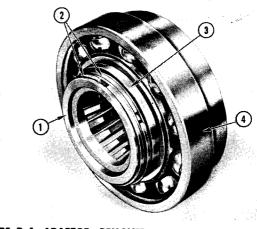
ADAPTOR, REMOVED 1. Hub 3. Retainer Ring 2. Rings 4. Bearing
